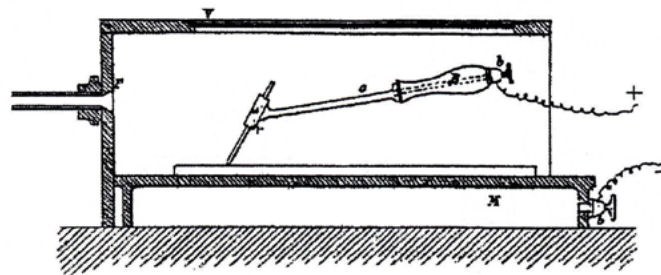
Machine for the arc welding of battery plates invented by Augusta de Meritens [4]
